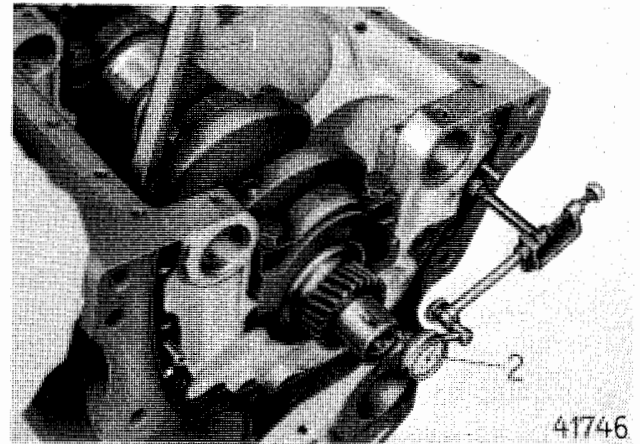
Measuring Crankshaft End Play with Dial Indicator
